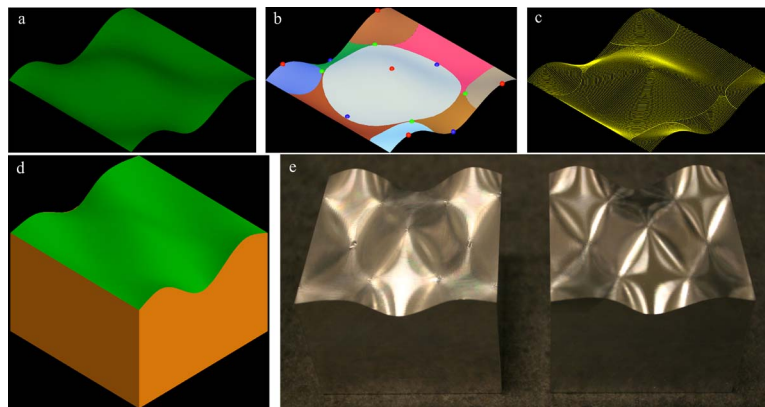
Freeform surface recognition and machining: (a) freeform surface of 3D industrial model, (b) recognized machining patches, (c) iso-pick feed tool path generation, (d) CAD industrial model, and (e) surface machining comparison between ESPRIT Modular CAM processor and this proposed algorithm
